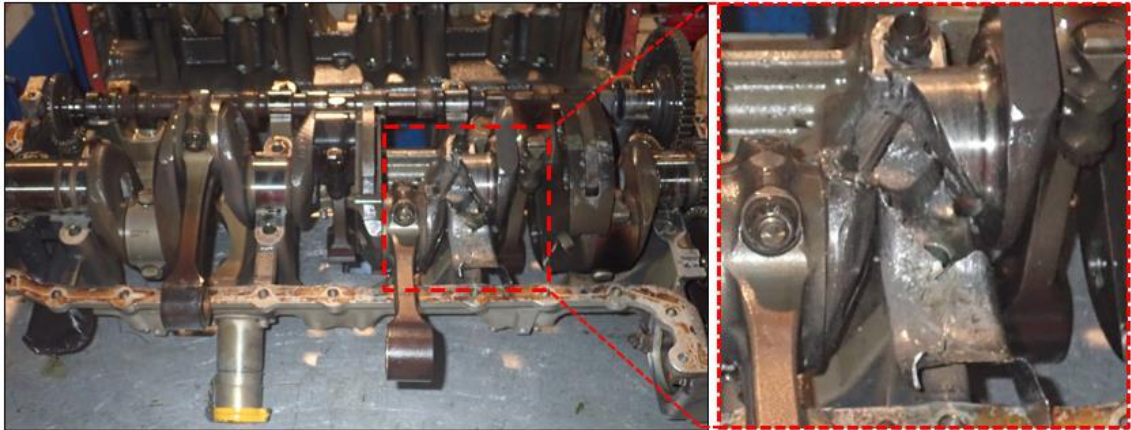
Damaged crankshaft sitting in the L/H crankcase
